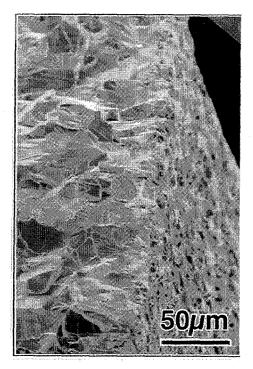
View of inner surface of pinhole and fracture surface of QN74 specimen. Crack grew from outer specimen surface towards pinhole.
